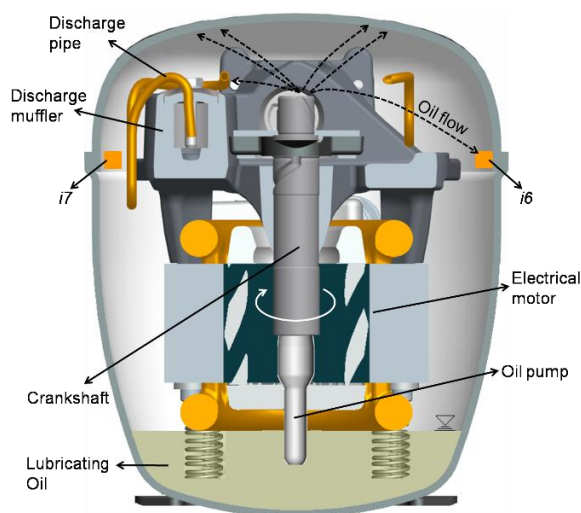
Schematic 3D view of a typical reciprocating compressor.
